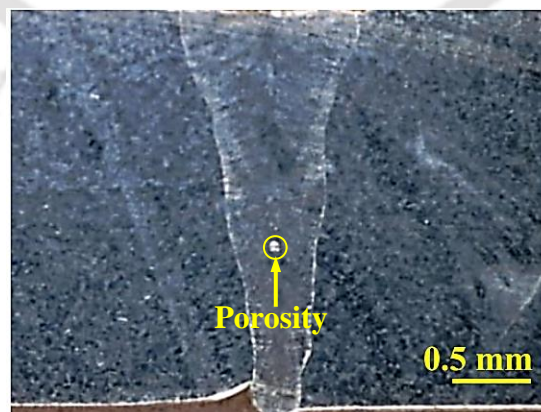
Weld bead at optimal welding condition as given in Table 7.8
